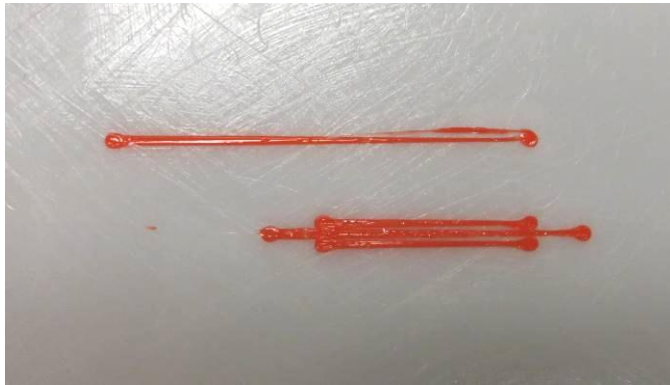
LEFT REAR corner with space between the test line and top and bottom lines.
